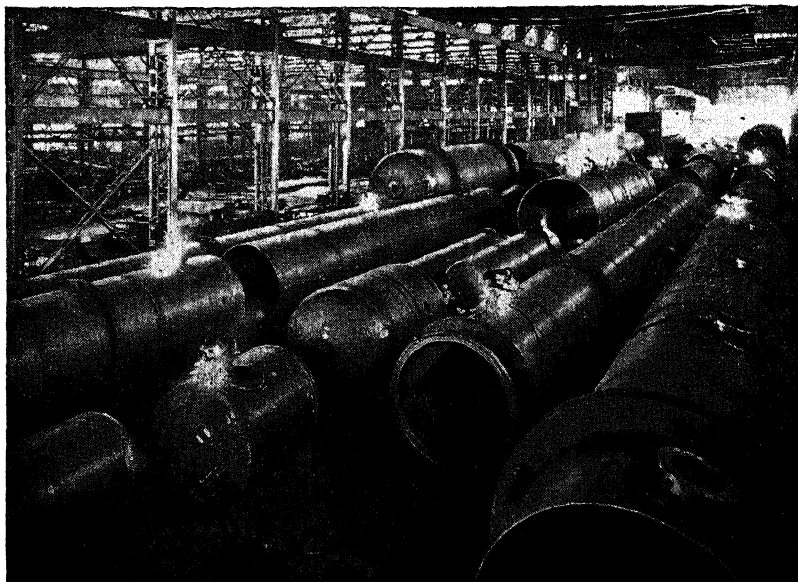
View in the welding shop of a large California manufacturer of refinery equipment.
